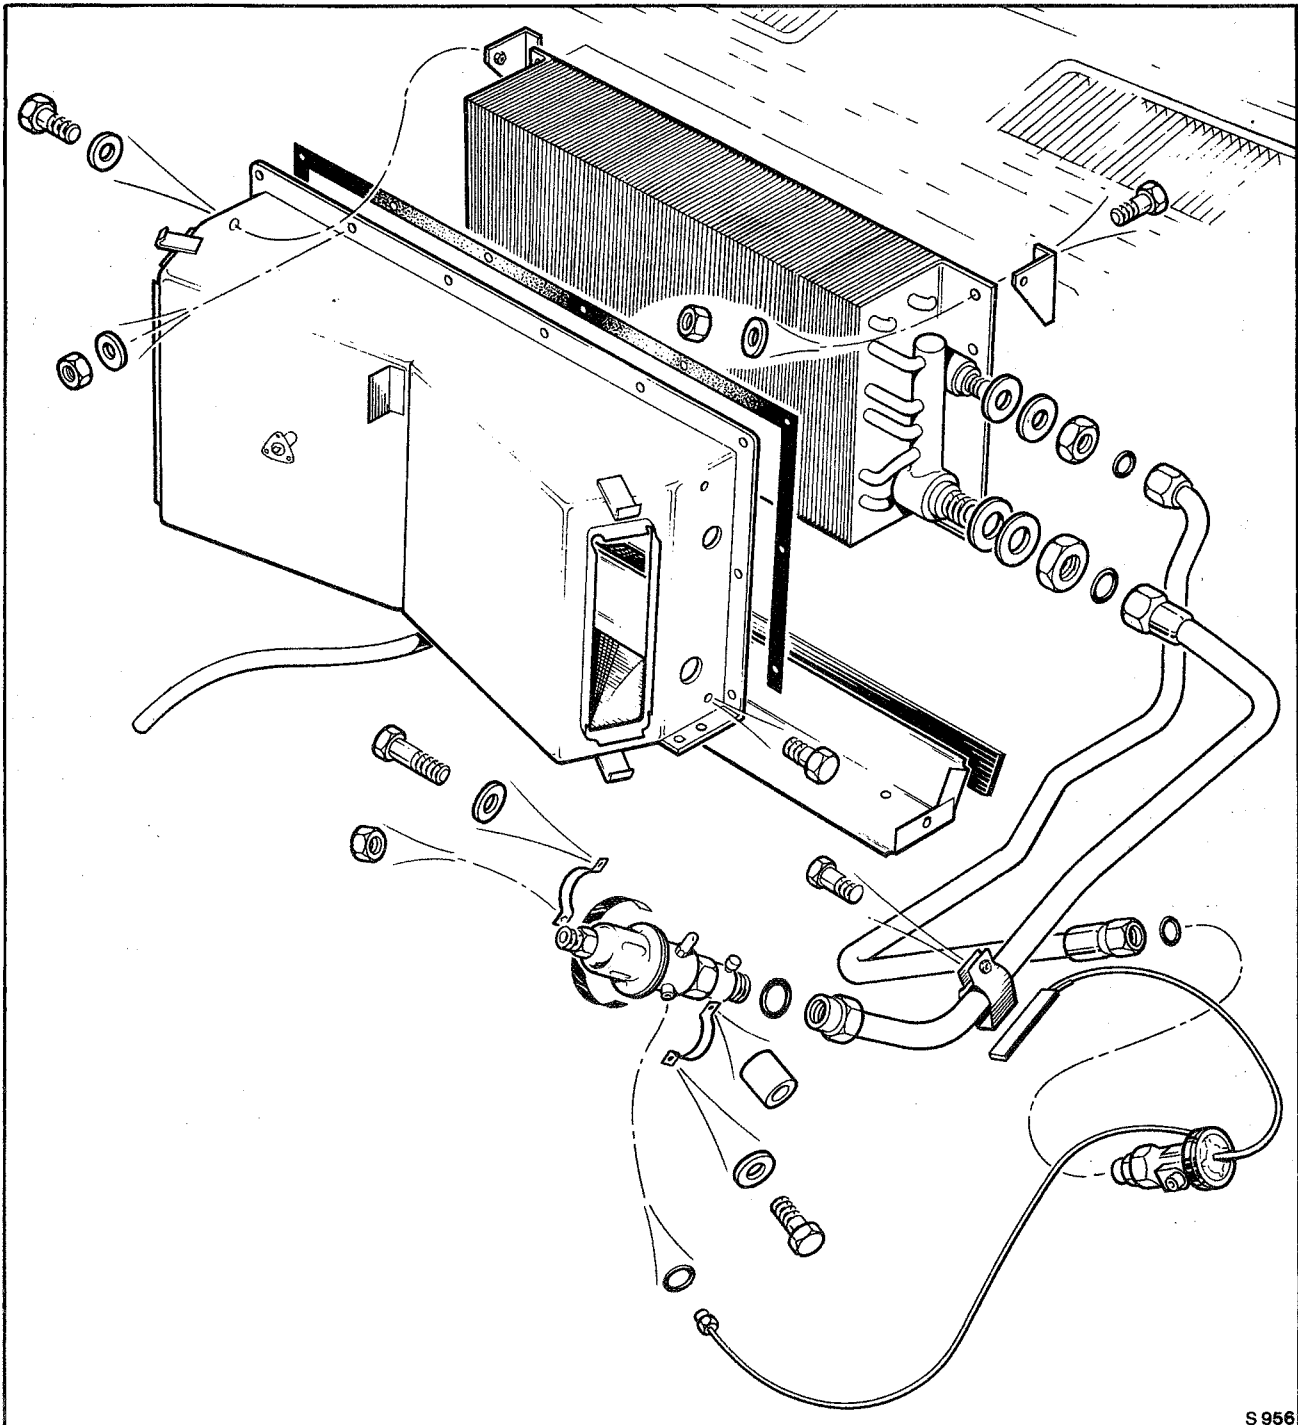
Evaporator and pipes, suction throttling valve and expansion valve
